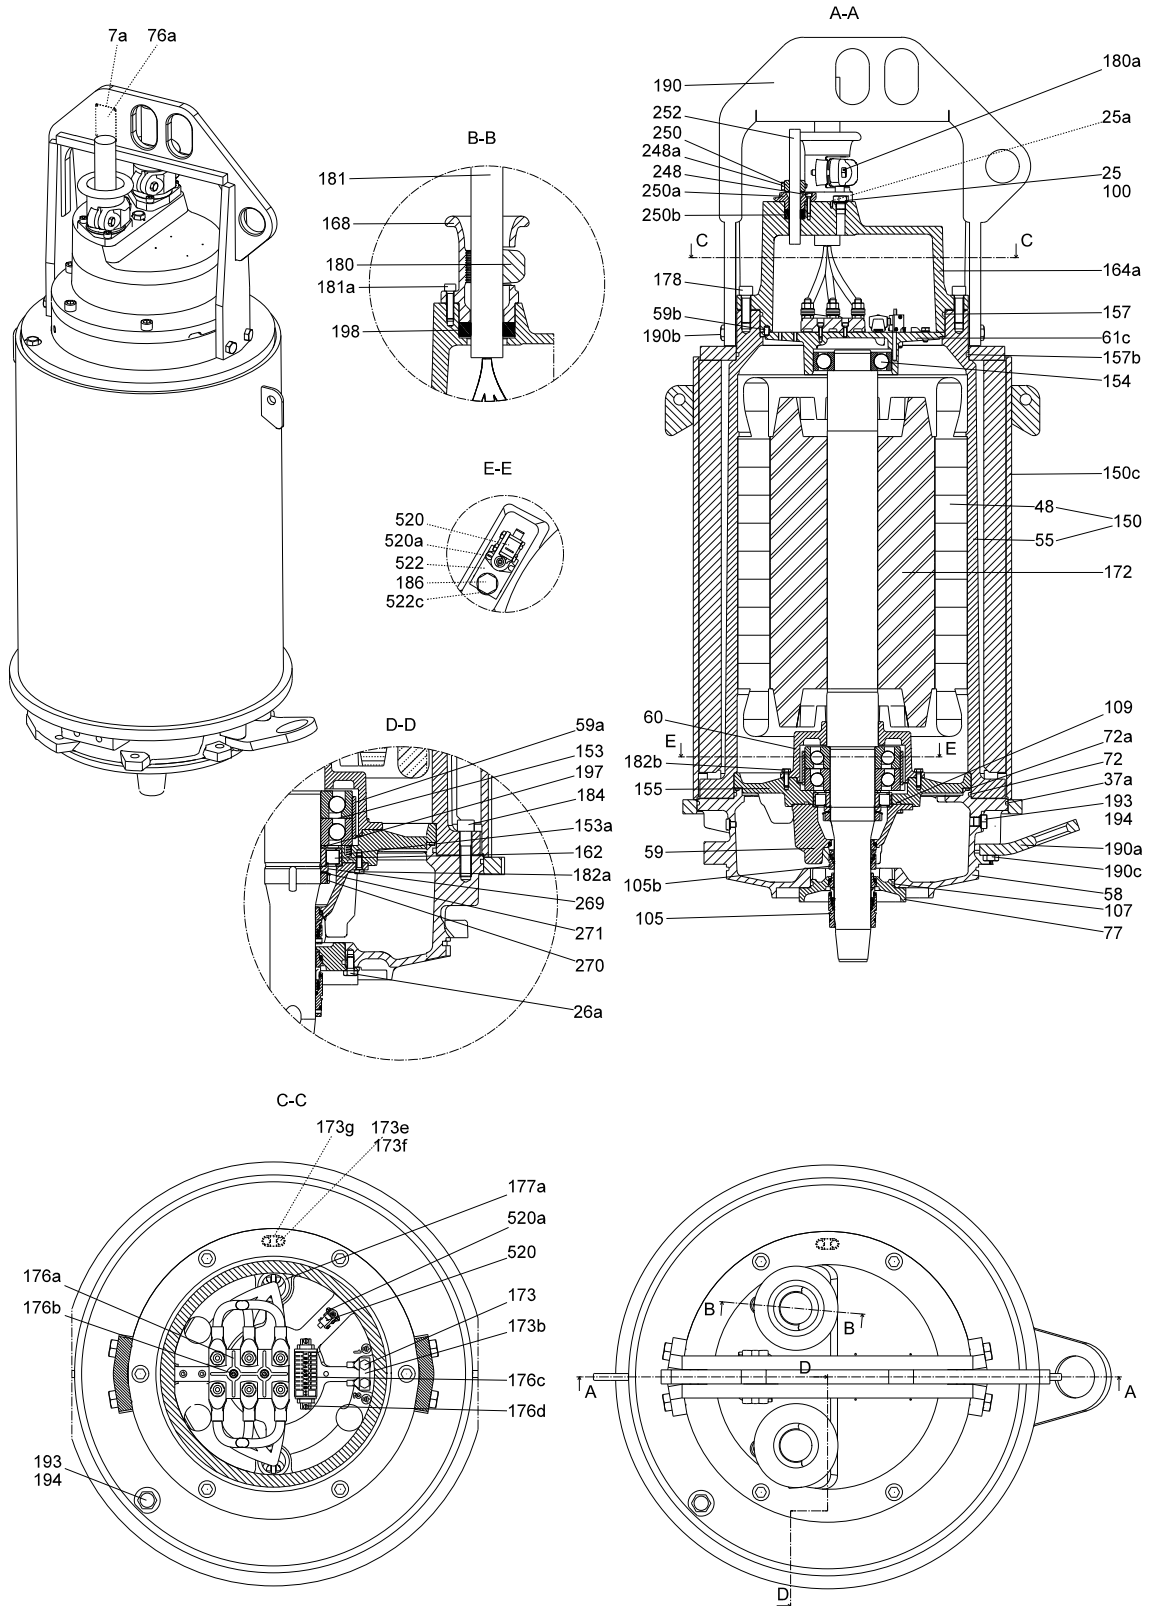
Explosion-proof motor with cooling jacket (installation types C, D and H)
